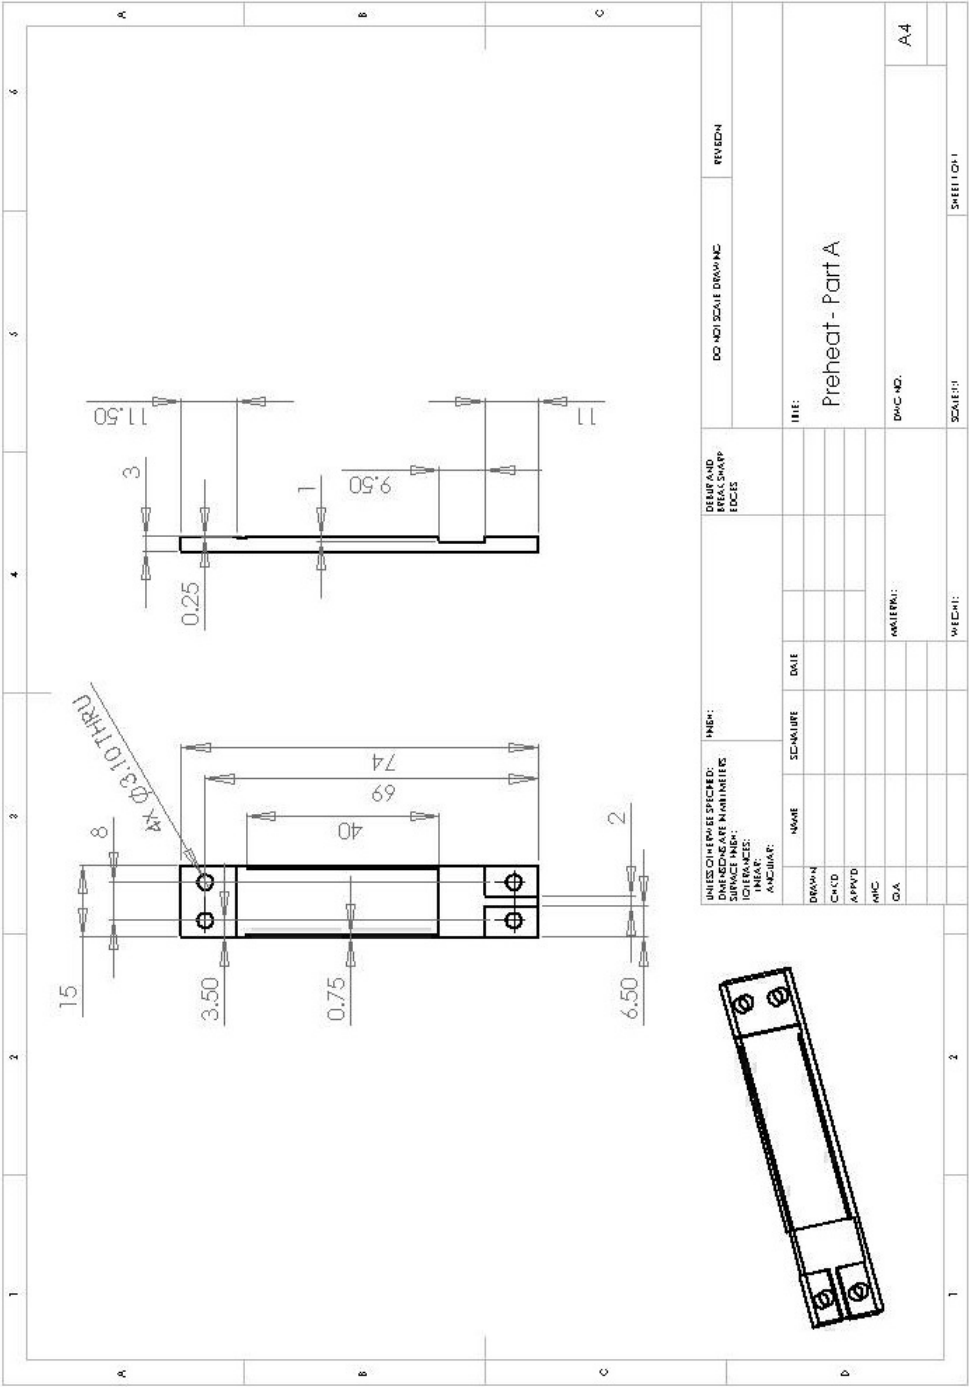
Part A of the preheat used in chapter 4 - Dimensions in mm.
